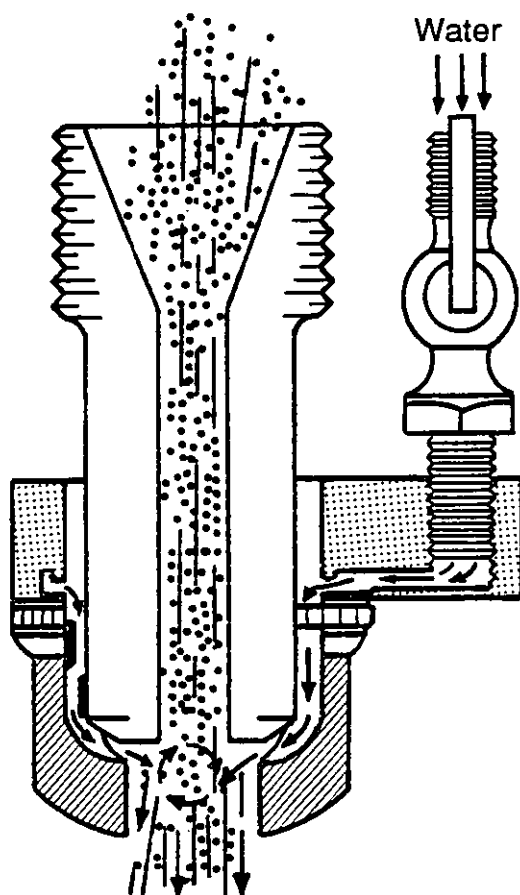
Adapter Nozzle Converting a Dry Blasting Unit to a Wet Blasting Unit
